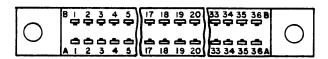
KI 244 COMMECTOR P2441 NO KEYING CABLE TERMINATION, SOLDER EYELET VIEW OF FEMALE CONNECTOR
